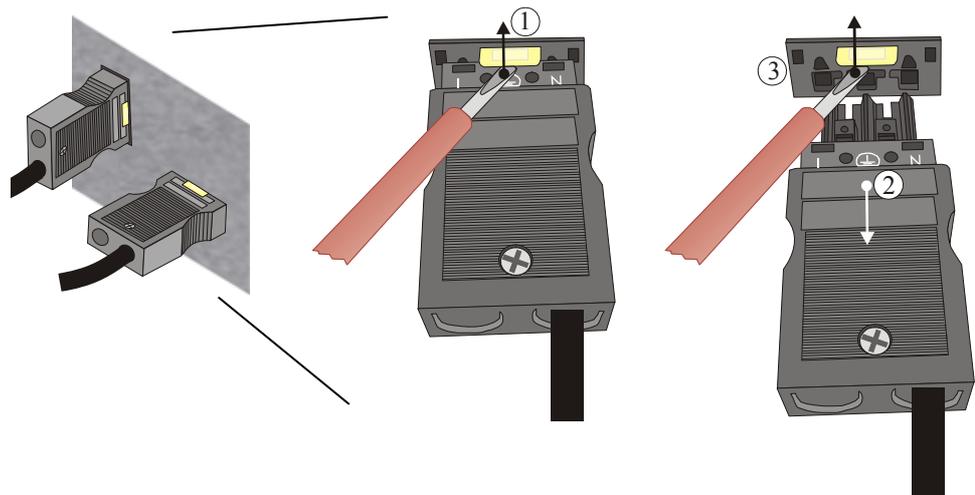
Separate the snap-in coupling (plug) from the furnace housing
